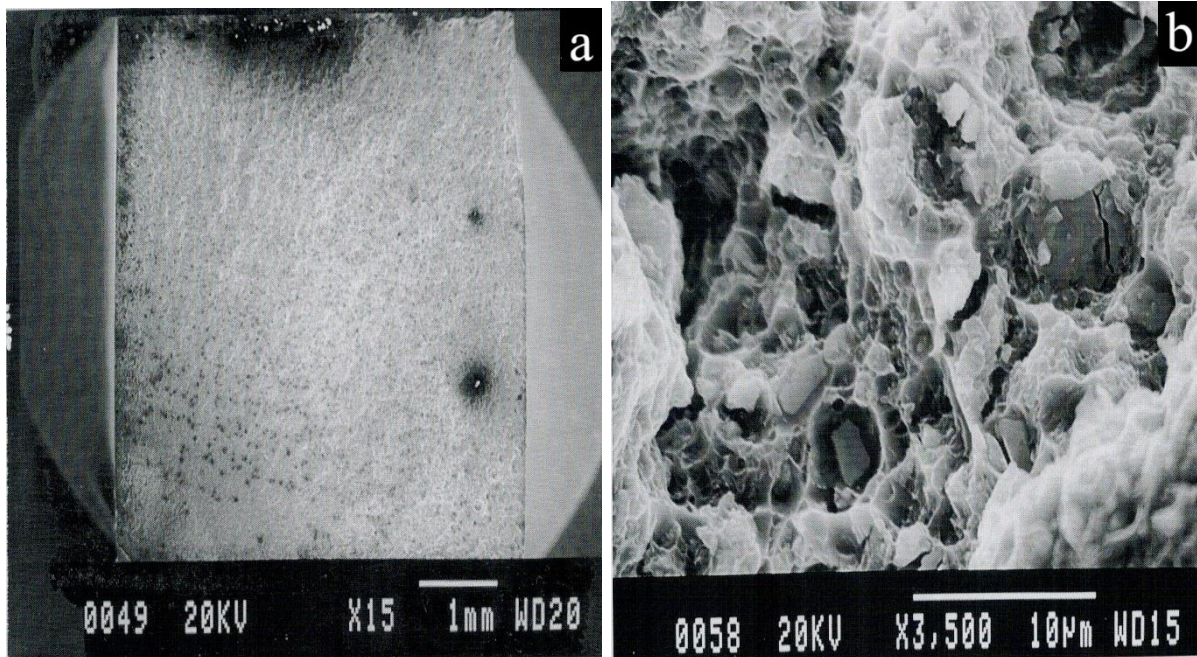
a) Fracture surface of AMC 225 in salt solution b) Fracture surface of the same MMC in the overload region. The crack propagates from left to right
